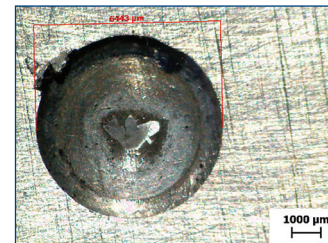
Upper view of spot weld electrode damage indentation
